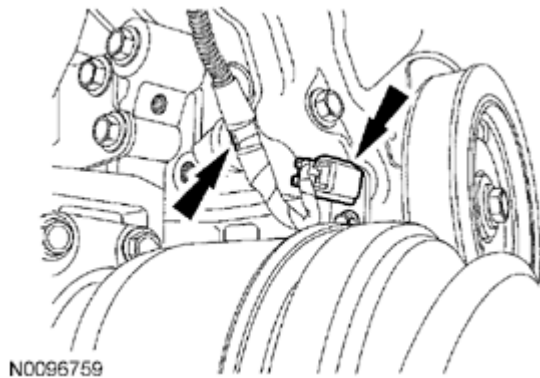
Locating Crankshaft Position (CKP) Electrical Connector And Wiring Harness Retainer
